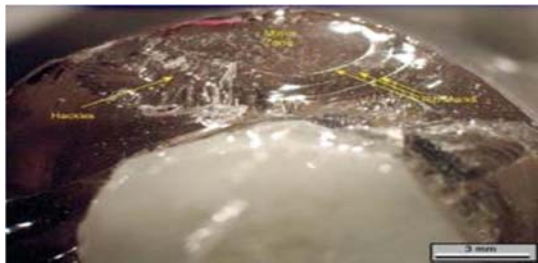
Brittle fracture of an epoxy layer displaying a mirror zone, rib marks, and hackles. [2]
